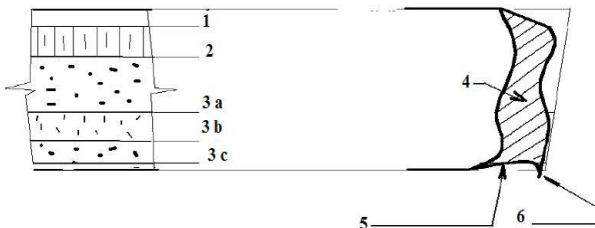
Zones of a sheared surface (1 – rollover, 2 – plastic shear, 3a – fracture, 3b – abrasion, 3c – fracture, 4 – hardened area, 5 – tool mark, 6 – burr)
